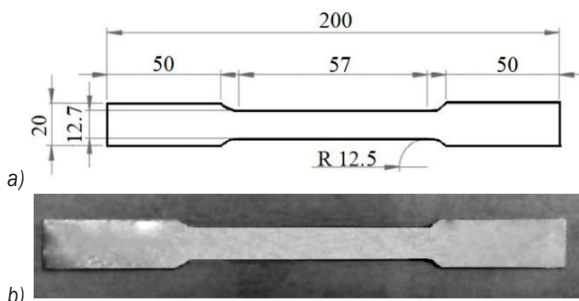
a) Dimensions, and b) the actual image of one of the tensile test specimens
